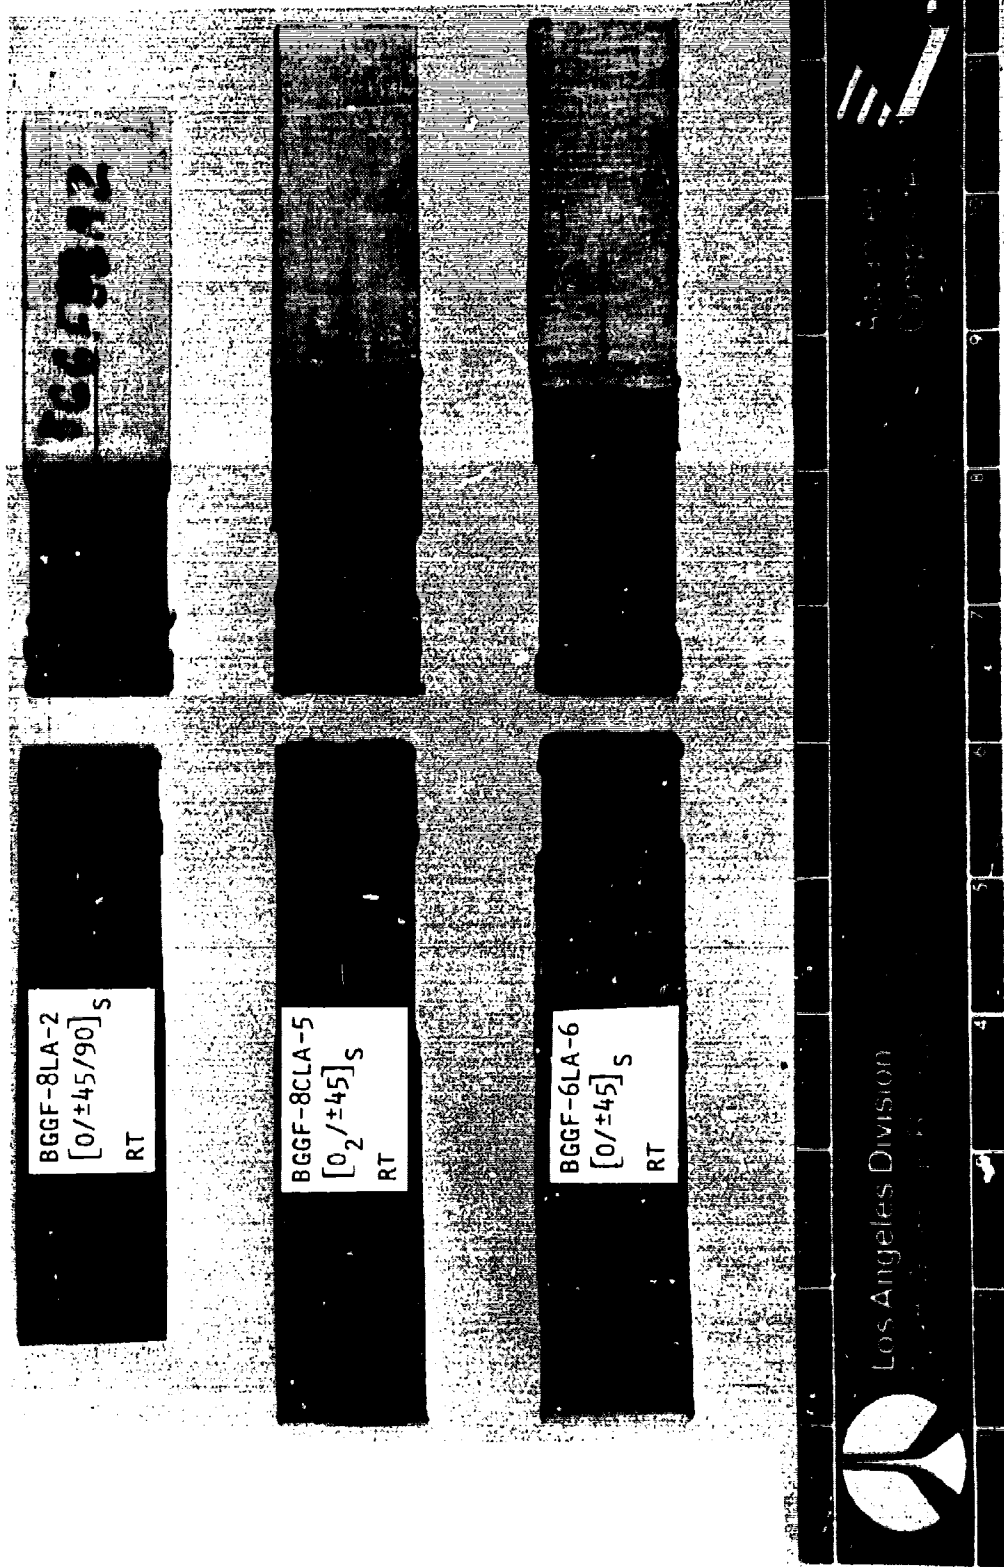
Typical Graphite/Epoxy to Graphite/Epoxy Bonded Single-Lap Joint Tension Fatigue Specimens - RT (Type AS/3002 - Batch) Metibond 329-7 Adhesive
